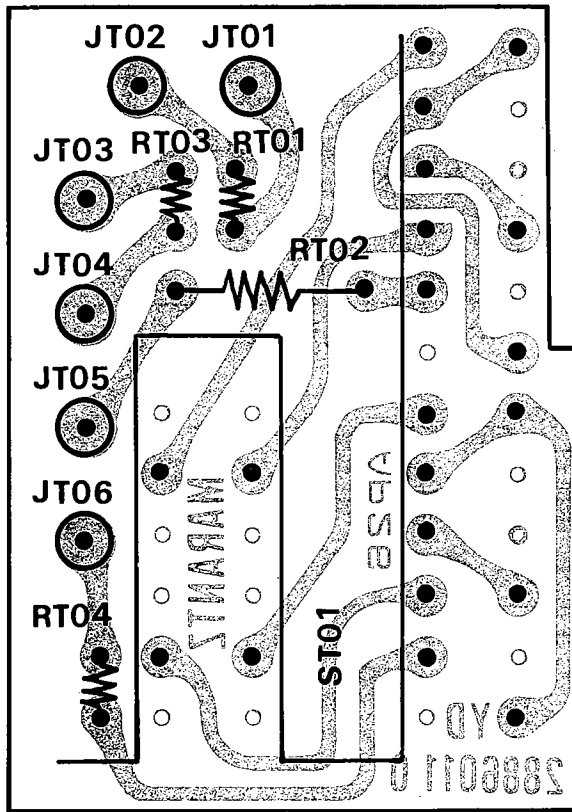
Tape Monitor Switch Unit Assembly PT01 Component Locations
